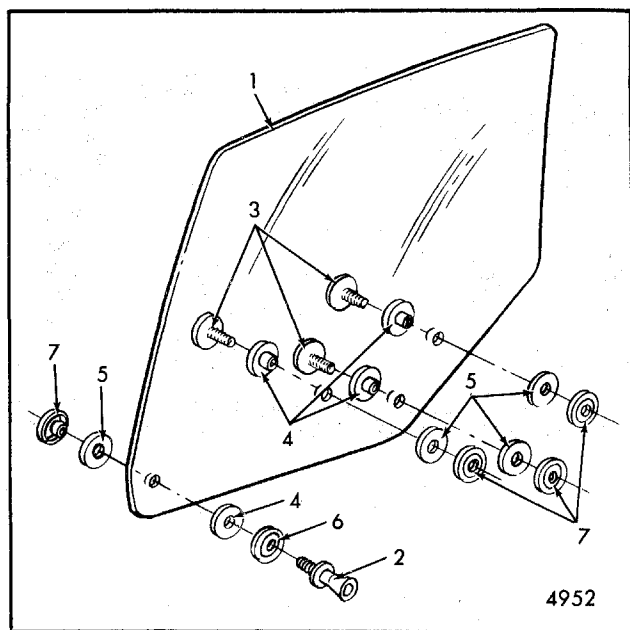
Rear Door Window Assembly - "A-29, 35" Styles
